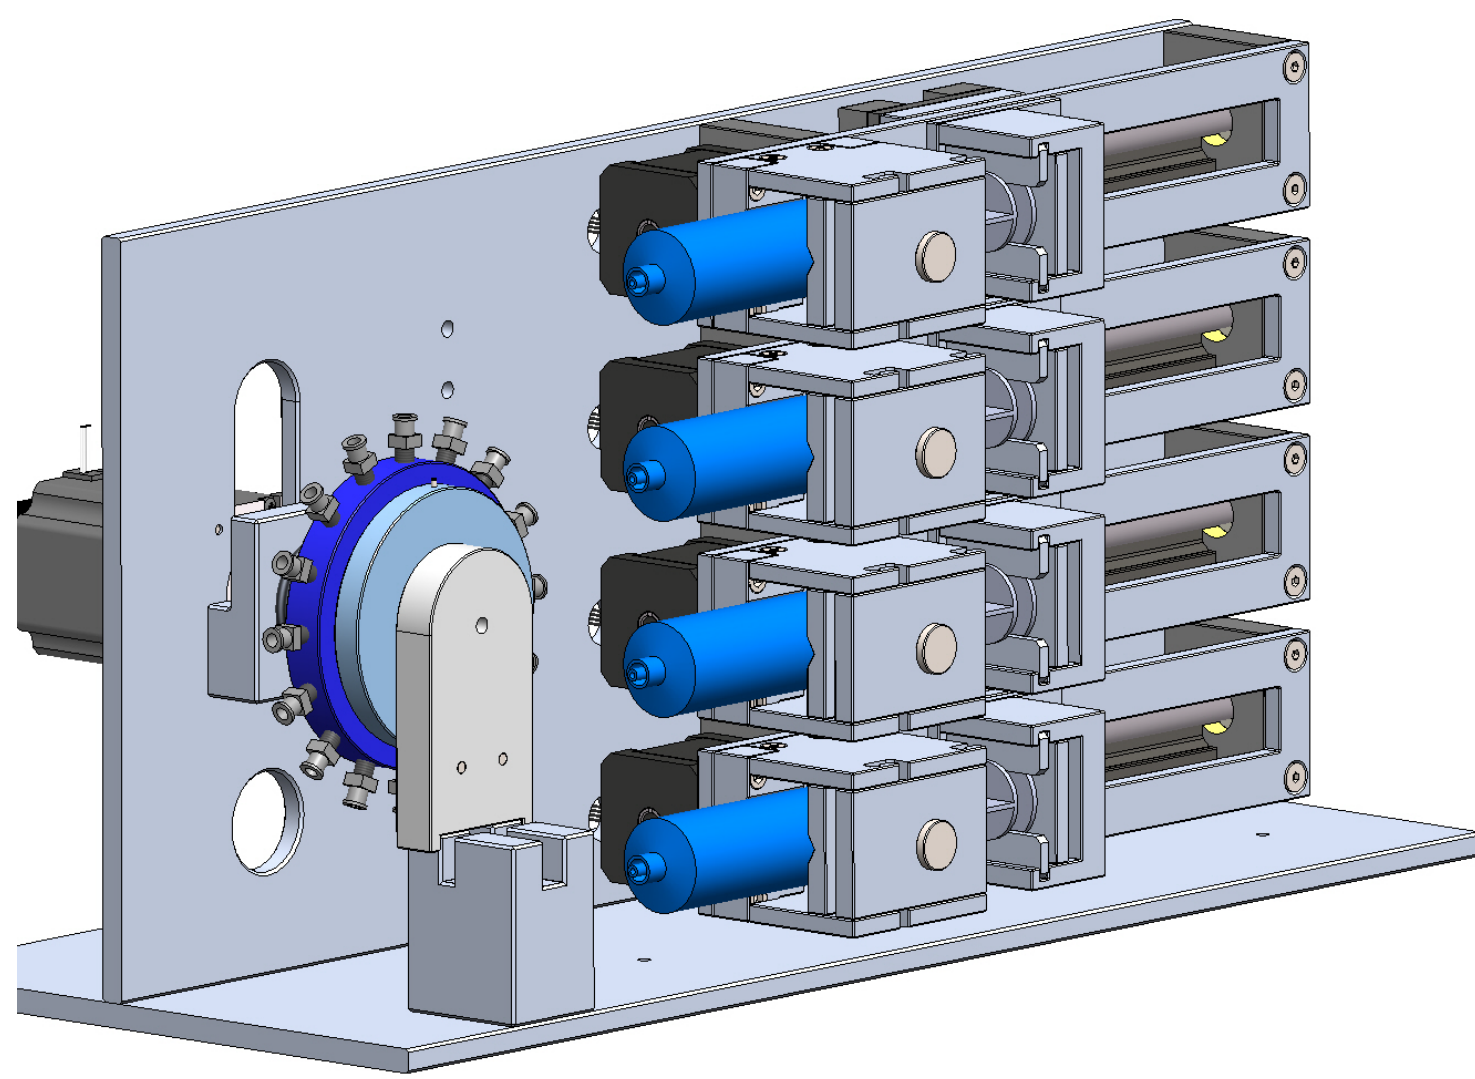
Concept design of Drug Multiplexing Infusion System with a central selection valve
